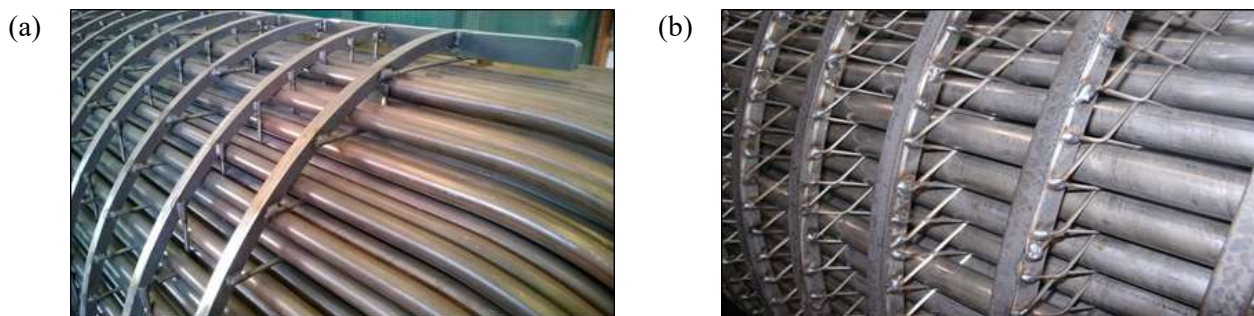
(a) EMbaffle® layout. (b) Rod baffle layout.
